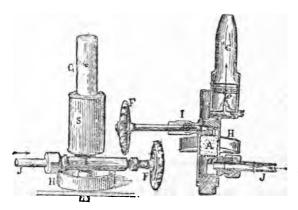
Small Burner with Coil. Fig. 13.—Section of Burner.
